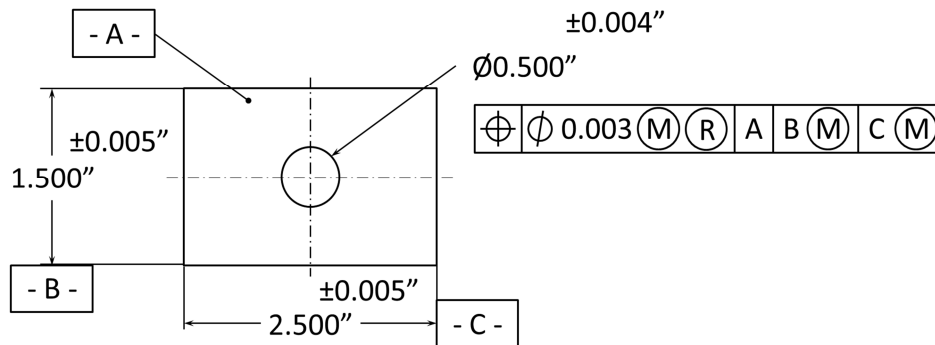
Engineering Drawing with Reciprocal Requirement as per ISO 1101:2004
